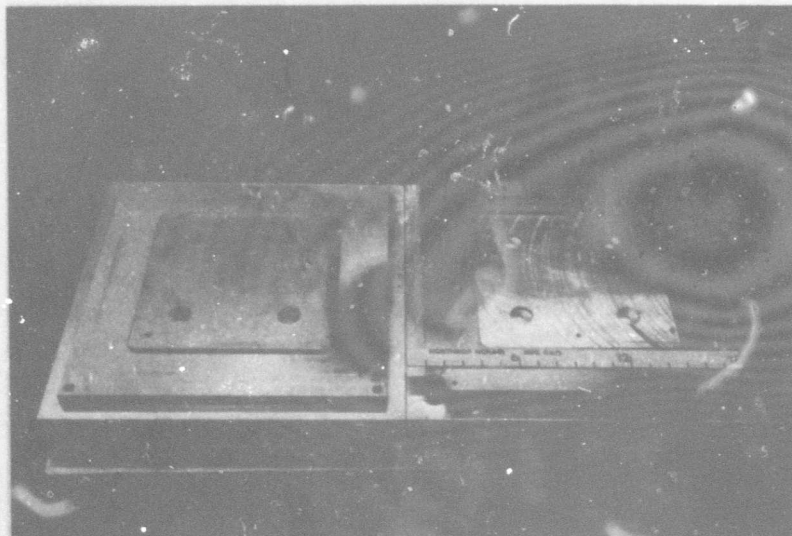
FORM DIE FOR INNER SKIN FLAT HEAT SHIELD
